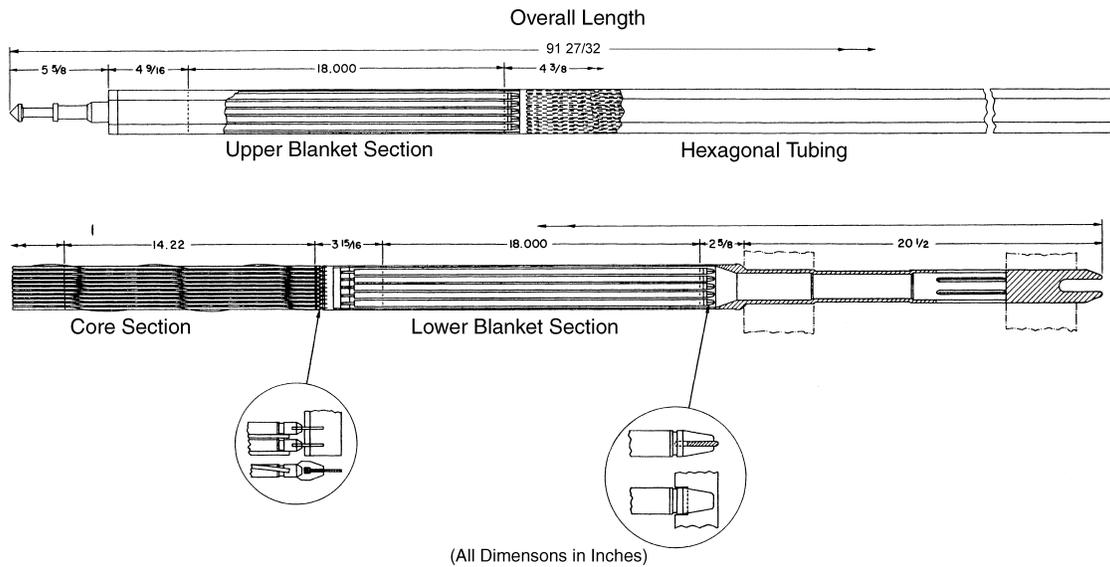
EBR-II CORE SUBASSEMBLY (EARLY DESIGN).
